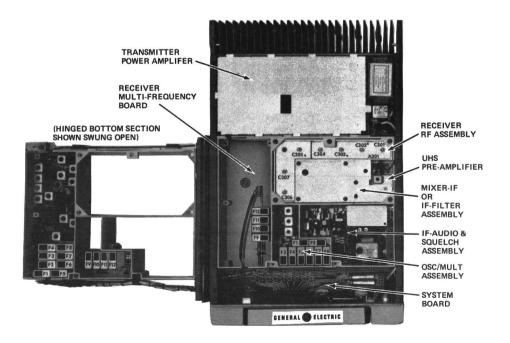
Typical Top Section Module Layout (Bottom Section Swung Open)
